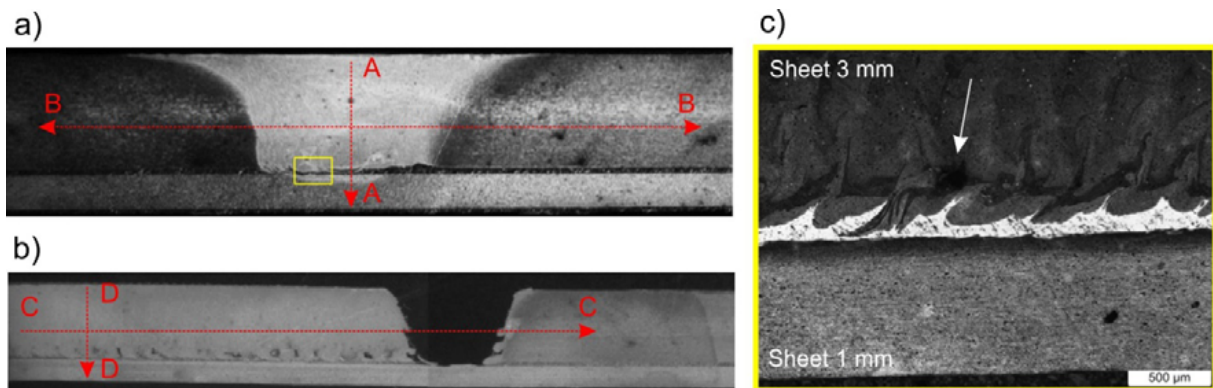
Macrostructure of weld No. 3 – a) cross-section (perpendicular to the weld axis), b) longitudinal section (along the weld axis), c) cross-section along the weld axis. Visible lines / bands of flow and discontinuities (arrow)
